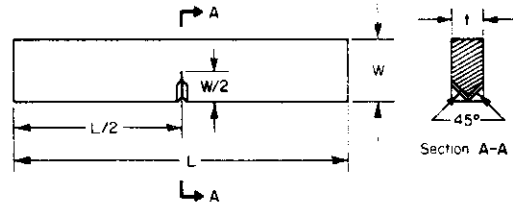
SLOW BEND FRACTURE TOUGHNESS SPECIMEN
